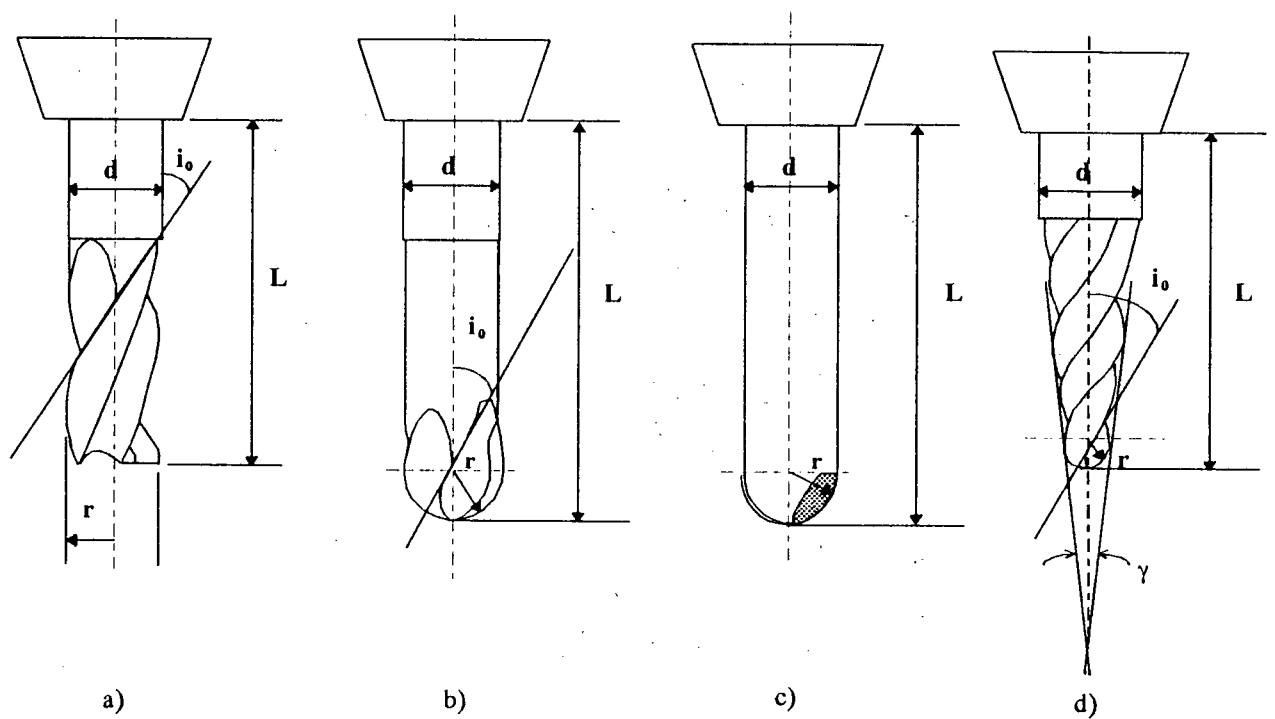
a) Cylindrical End Mill, b) Ballend Mill, c) Bullnose Mill, d) Tapered Ballend Mill
